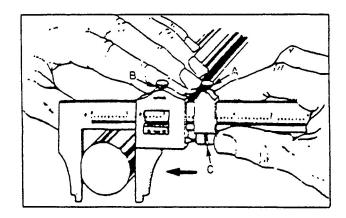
Taking an outside measurement with a vernier caliper.
